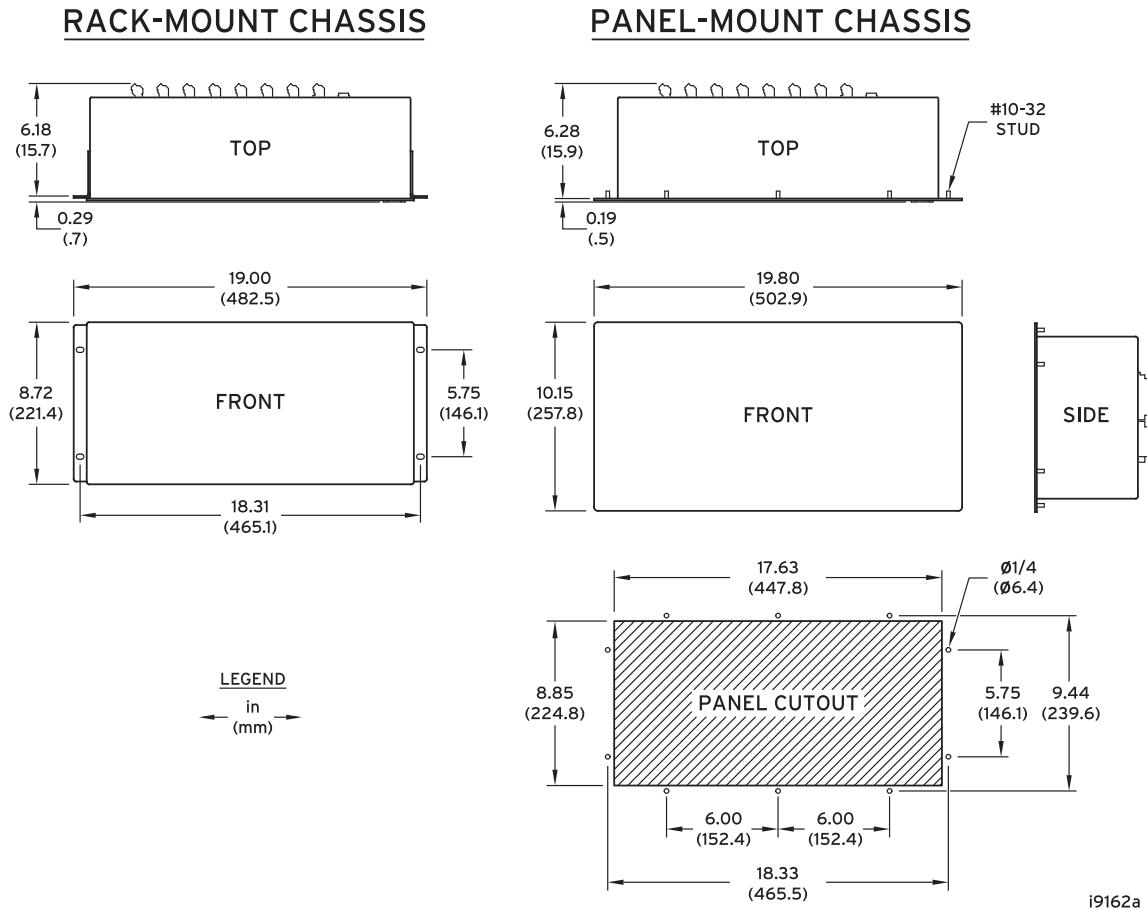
SEL-2523 Announcer Panel Rack-Mount and Panel-Mount Dimensions
